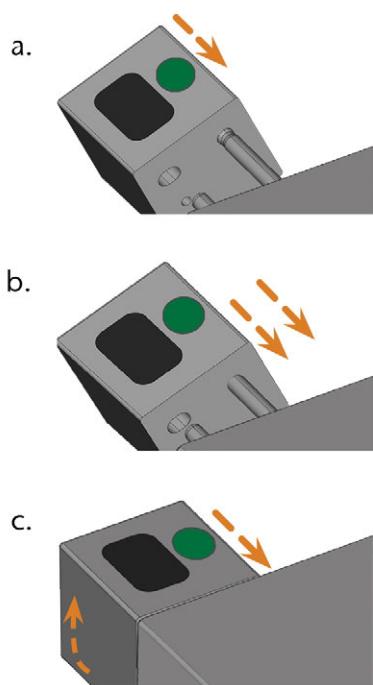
PLUGGING A TOOL MAGAZINE ONTO THE TOOL MAGAZINE HOLDER IN 3 STEPS
